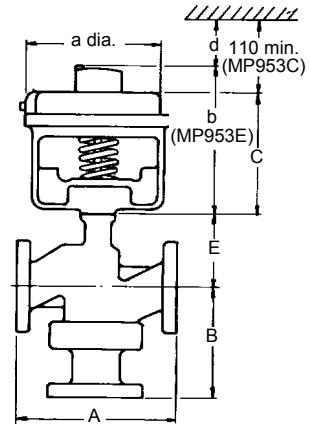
Dimensions assembled with actuator (mm) (1/2)
